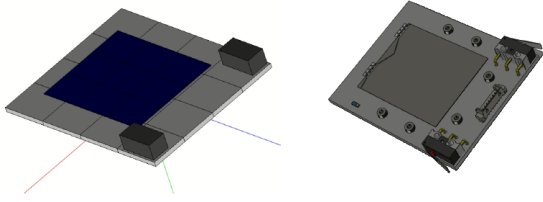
Comparison of the bottom board, with solar panel and killswitches.
